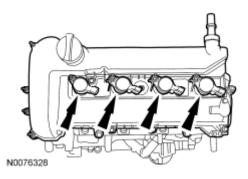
Locating Ignition Coil-On-Plugs And Bolts
